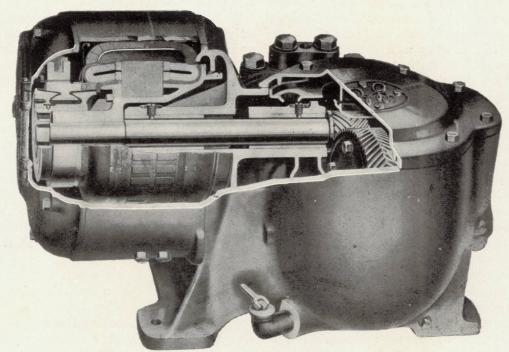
AIR COMPRESSOR SECTION SHOWING ELECTRICAL DETAILS
